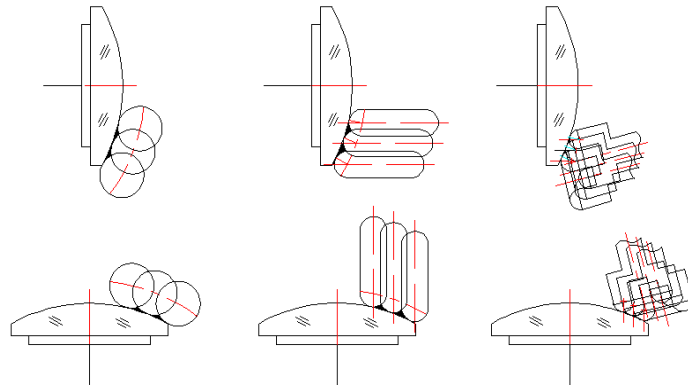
Position of workpiece and grinding wheel when machining convex aspheric surface
